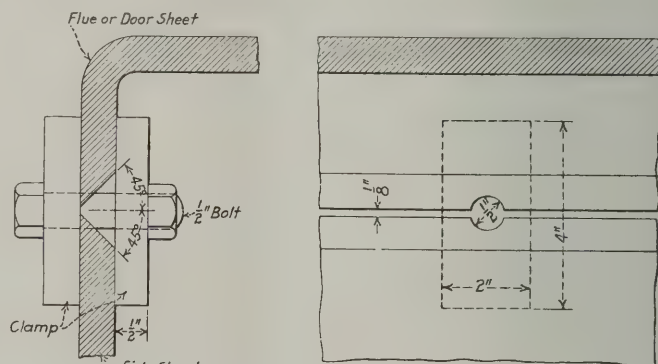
Clamp for Holding Fire Box Sheets in Line When Welding
